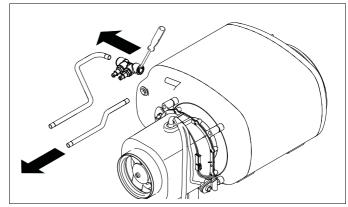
Remove hot and cold-water line connections and ventilation/overpressure valve.
